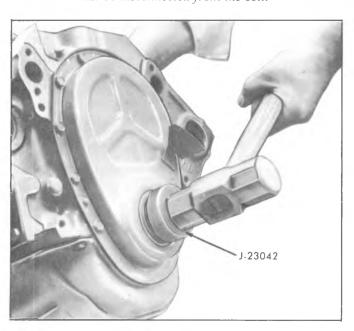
A-43V--Installing Oil Seal (Cover Installed)
